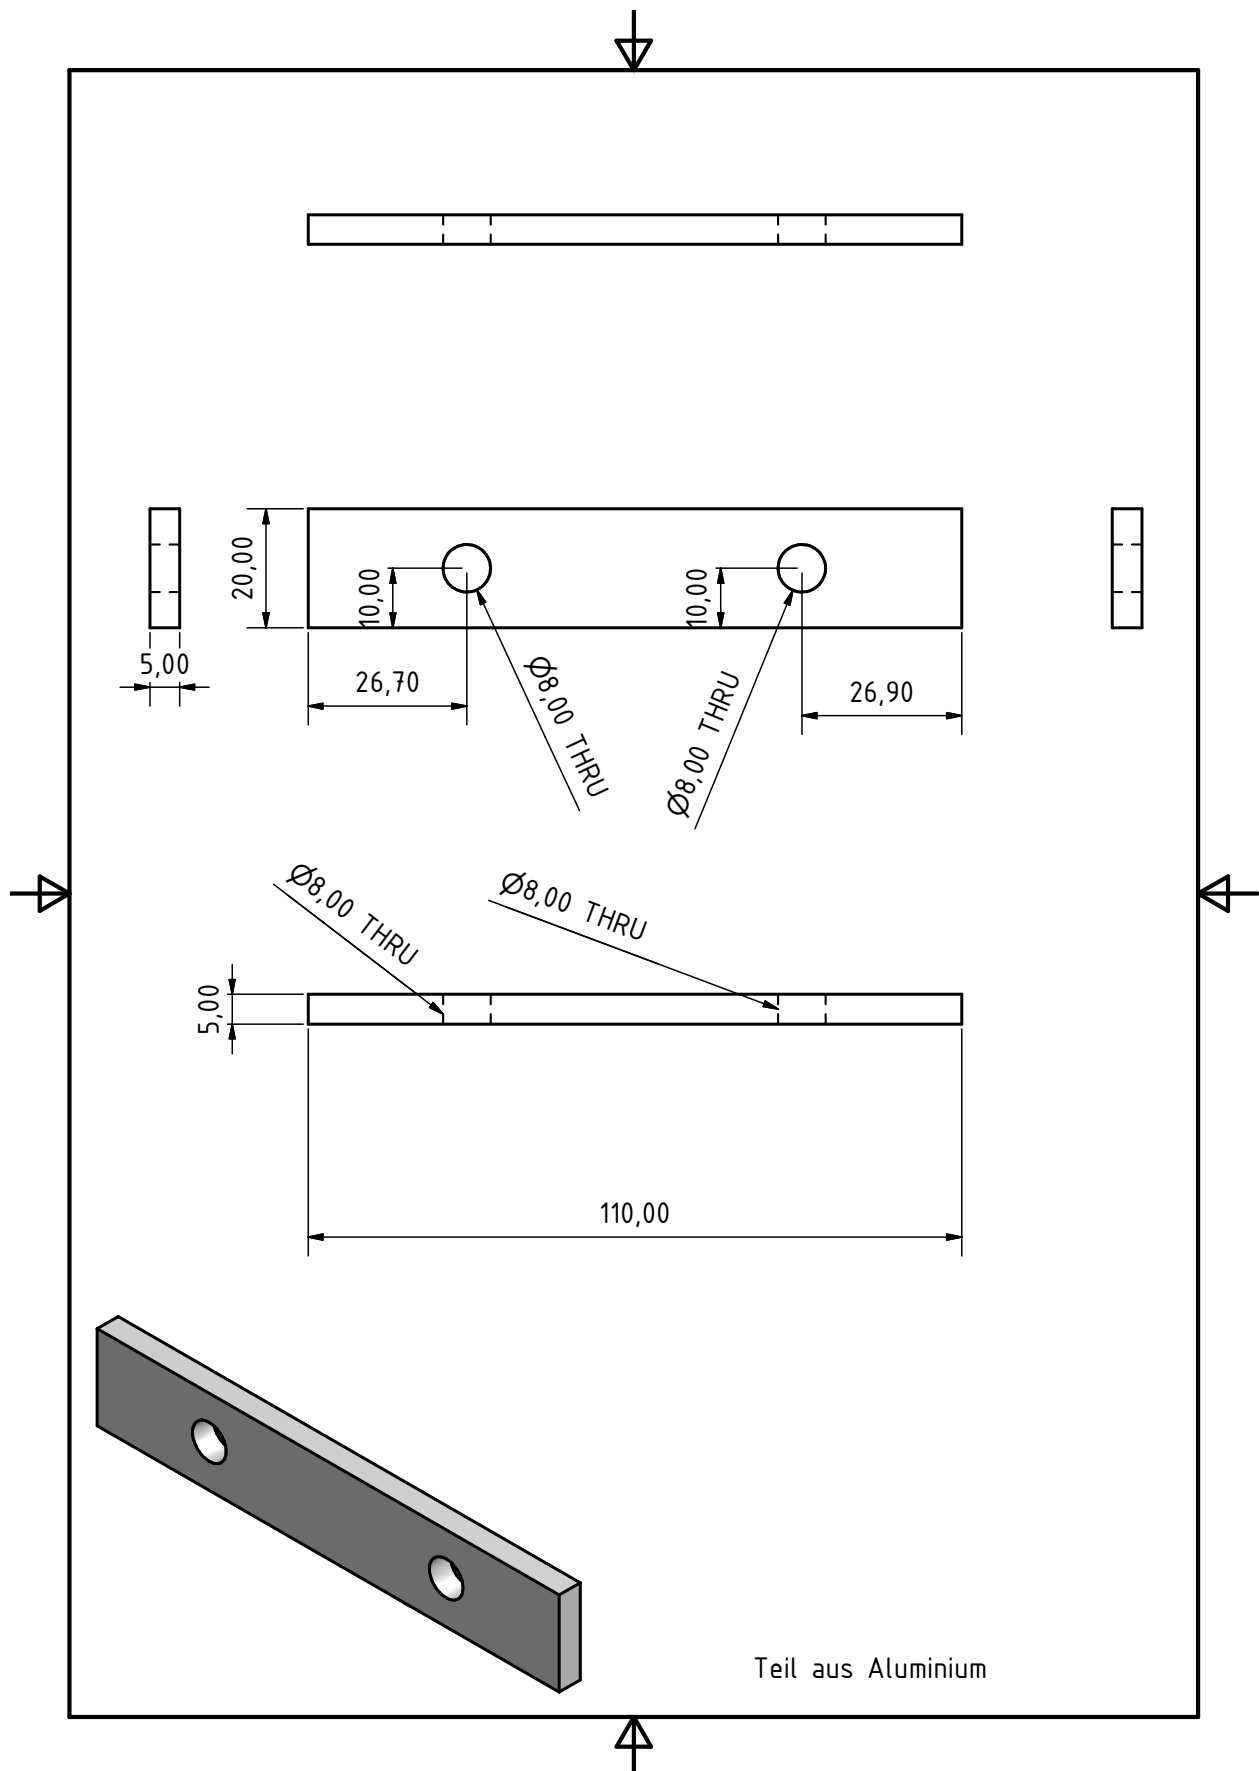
CAD sketch of detector locking bar to fix the part shown in figure E.26 in the horizontal plane.
